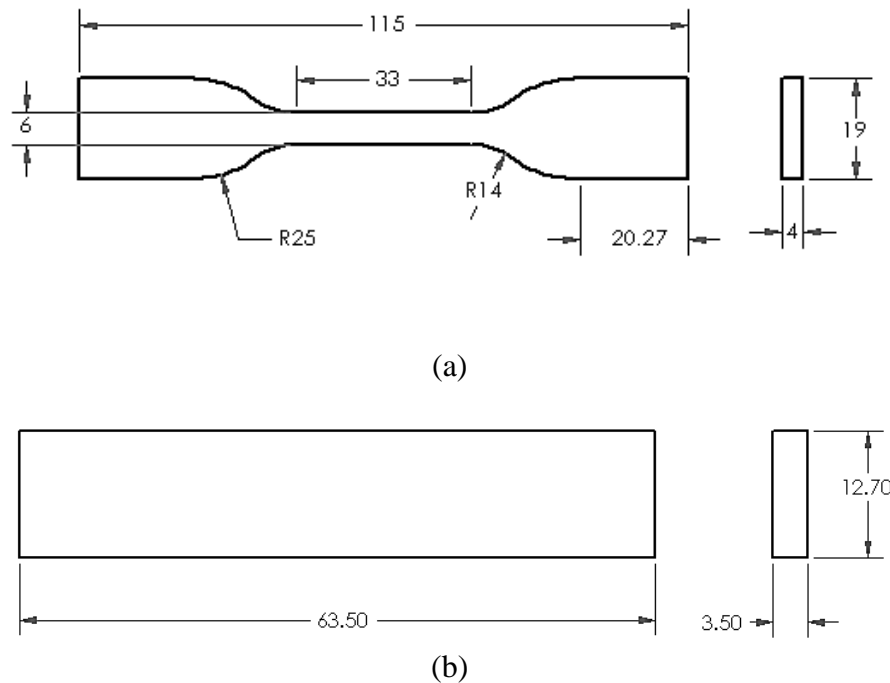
(a) Tensile test specimens and (b) flexural test specimen (in mm).
